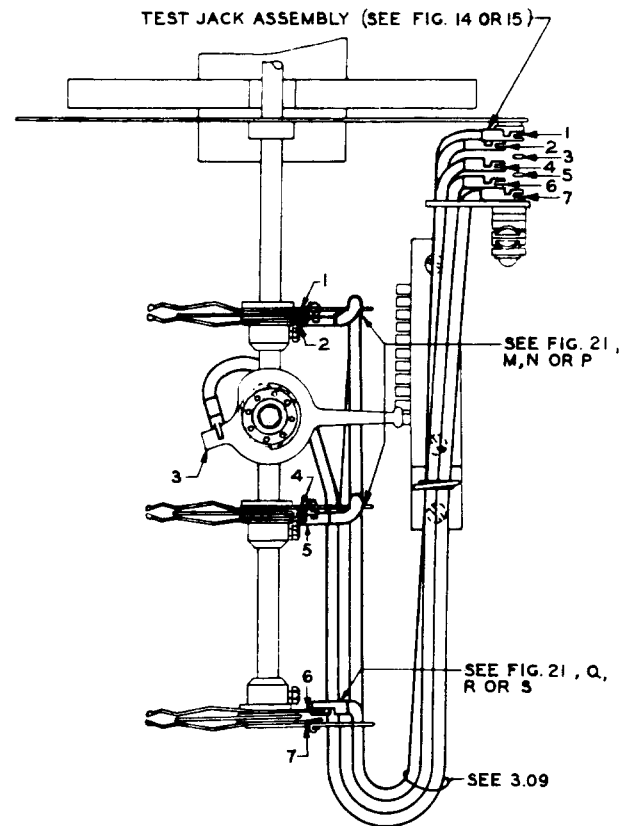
Method of Attaching M1R Wiper Cords to Switches Equipped With One Bank and a Commutator
